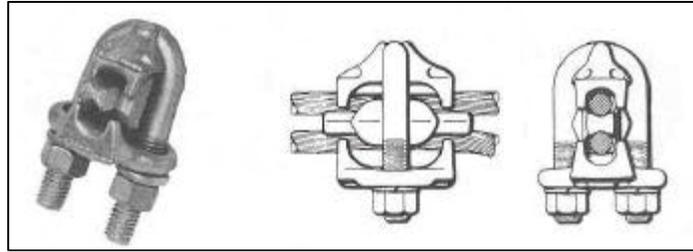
U-bolt-type clamp. (Source: Burndy Corp., Manchester, New Hampshire)
